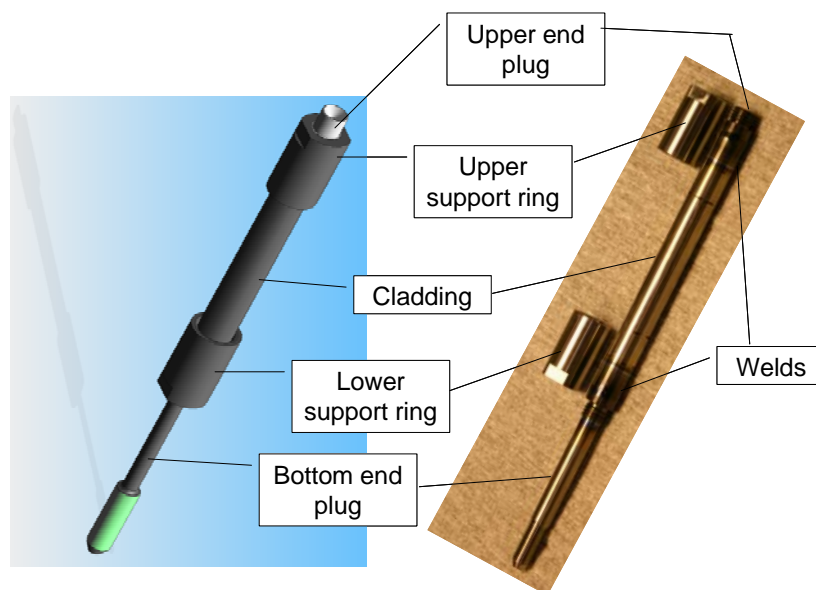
Specimen for Creep or Relaxation testing. The right picture shows the specimen before mounting the support rings
